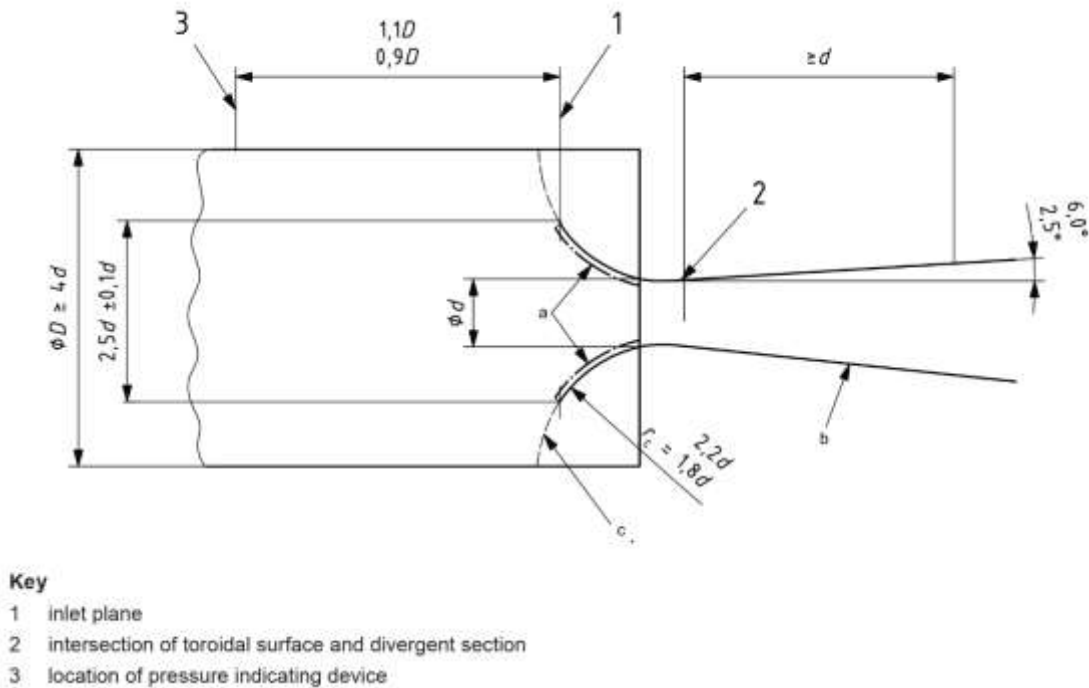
Design geometry of a Sonic Nozzle (ISO 9300, 2005)
